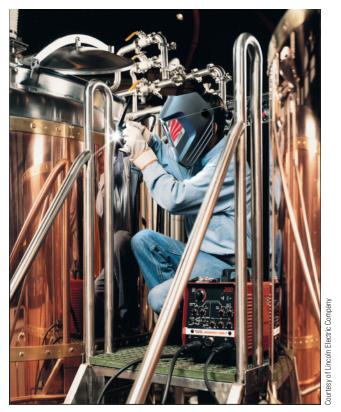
An operator GTA welds a cap ring on a pneumatic tank.
